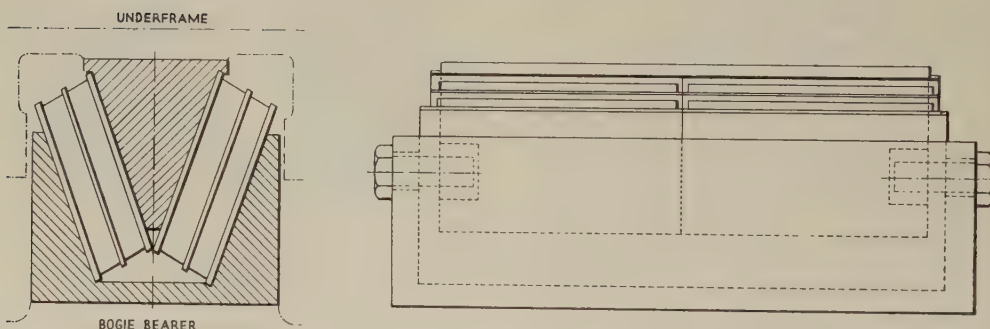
Side and end bearers of bonded rubber for bogie locomotive.
